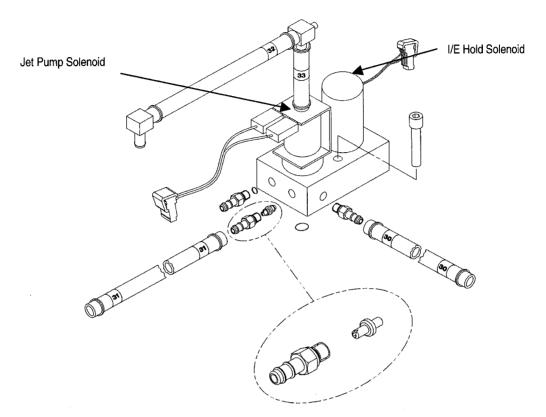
Jet Pump/I/E Solenoid Assembly (P/N 15651)
